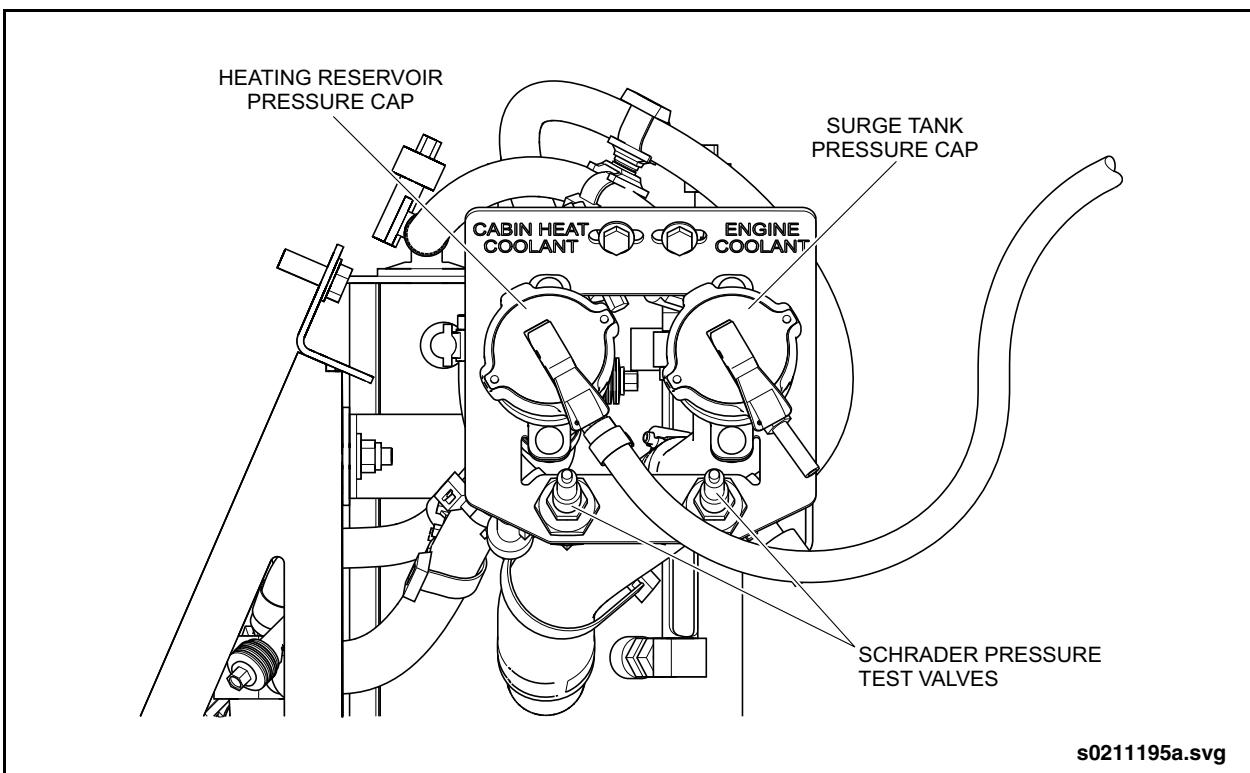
Heating Reservoir & Surge Tank Pressure Caps
